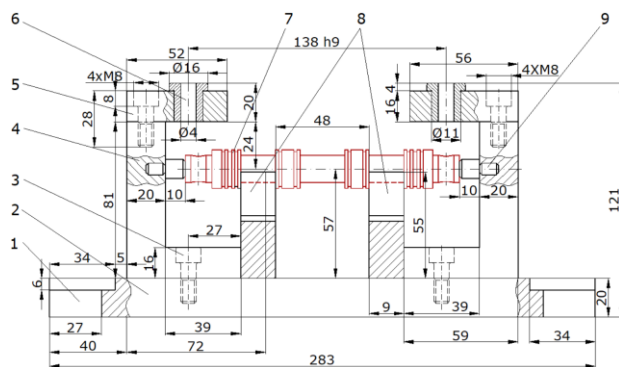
Scheme of the fixturing device for the spool valve: 1 - fixing hangers; 2 - base plate; 3 - screw M8x1; 4 - corner support; 5 - guiding plate for bushes; 6 - guiding bushes; 7 - spool valve; 8 - supporting prisms; 9 - supporting pin with plate cylindrical head.
